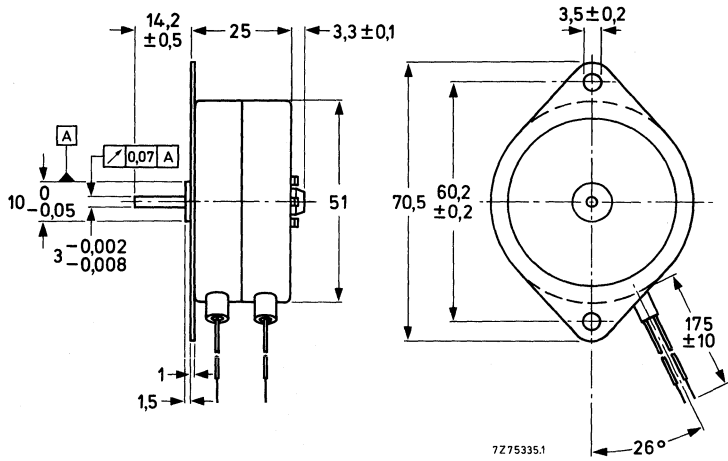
Motor 9904 111 31302; the leads are double insulated (AWG22).
